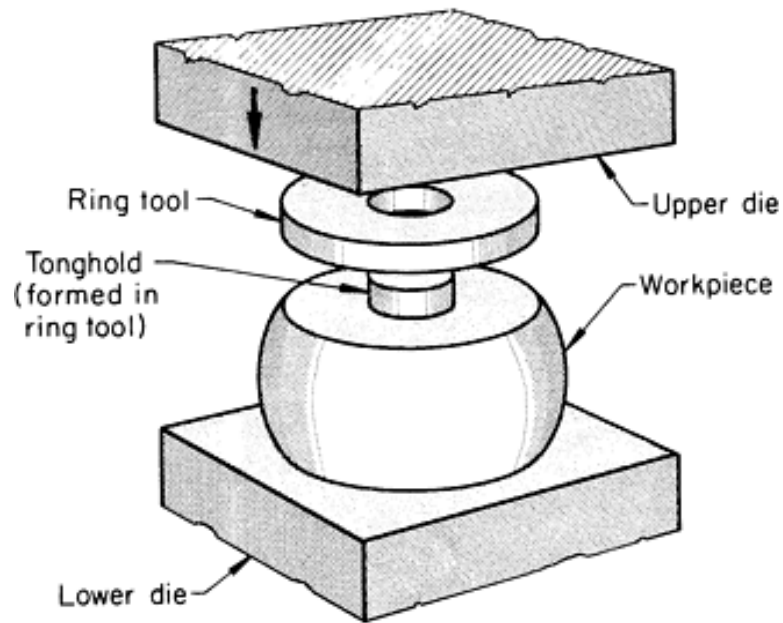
Setup showing use of a ring tool for forming and retaining a tonghold in the workpiece during upsetting
